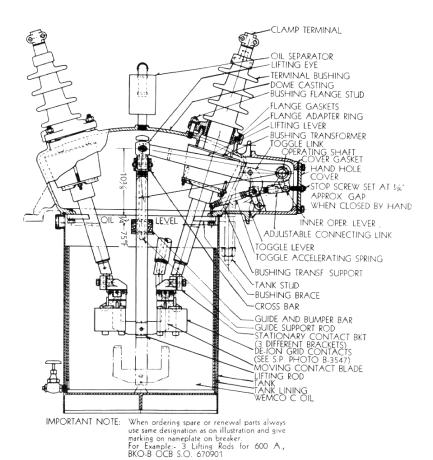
Amp., 15,000 Volt, Type BKOB-B Breaker-Sectional View
